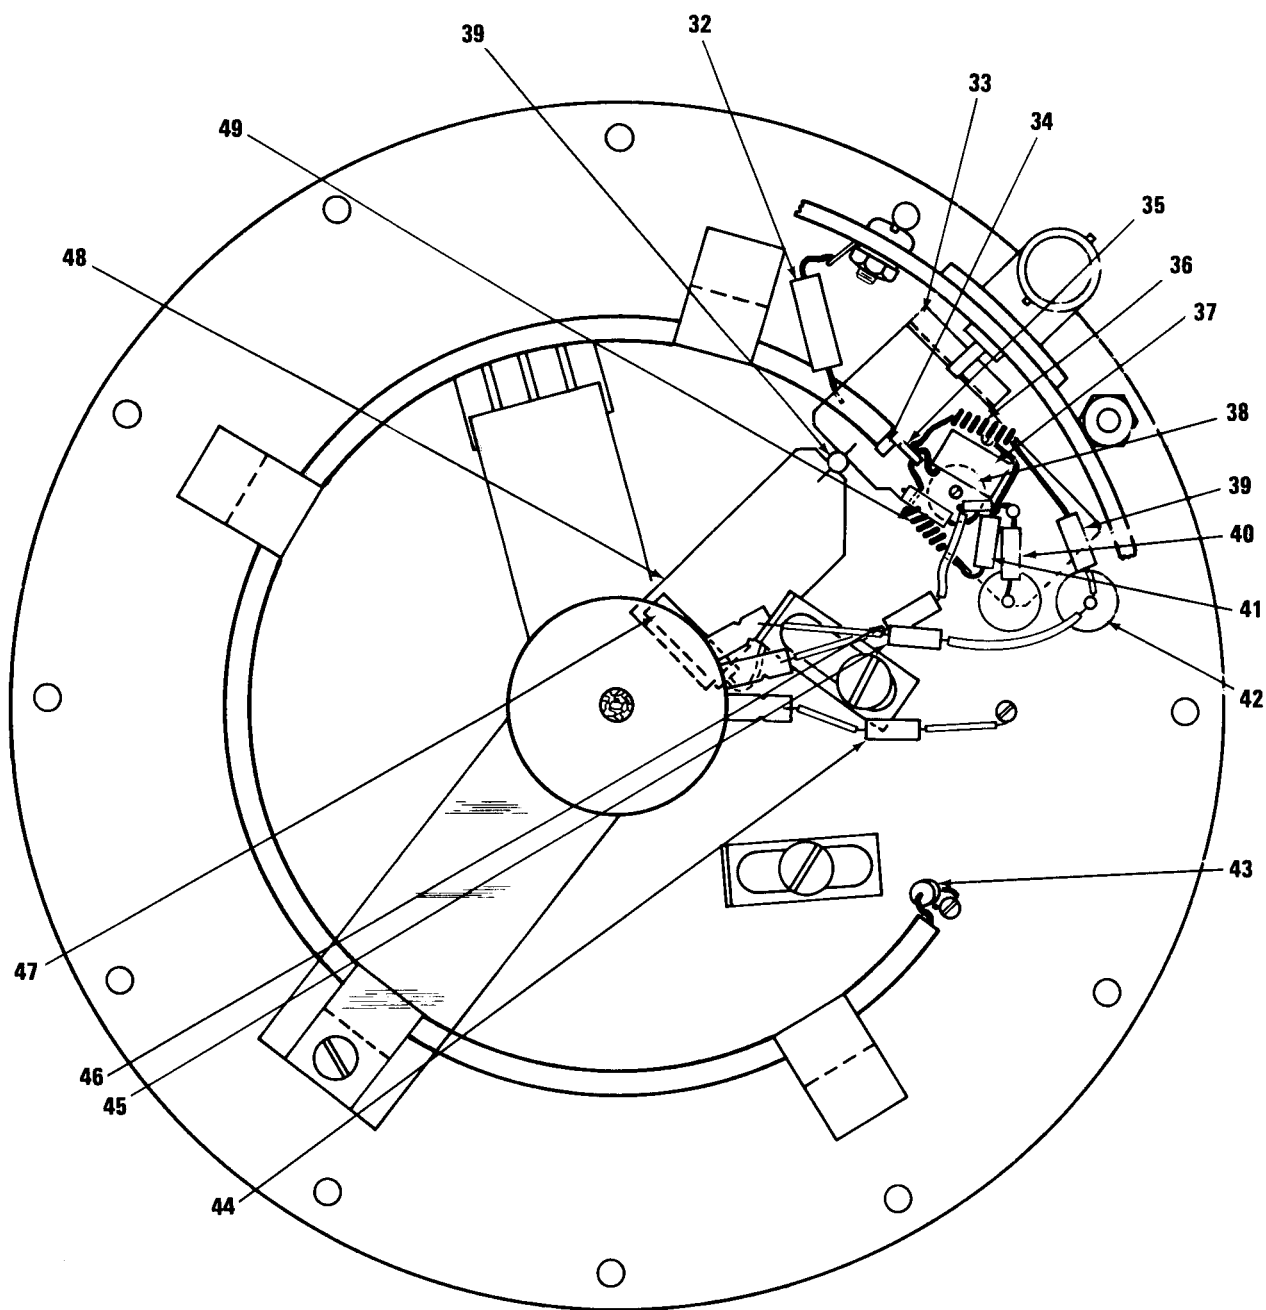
Base Plate Subassembly (Sheet 2 of 2)
